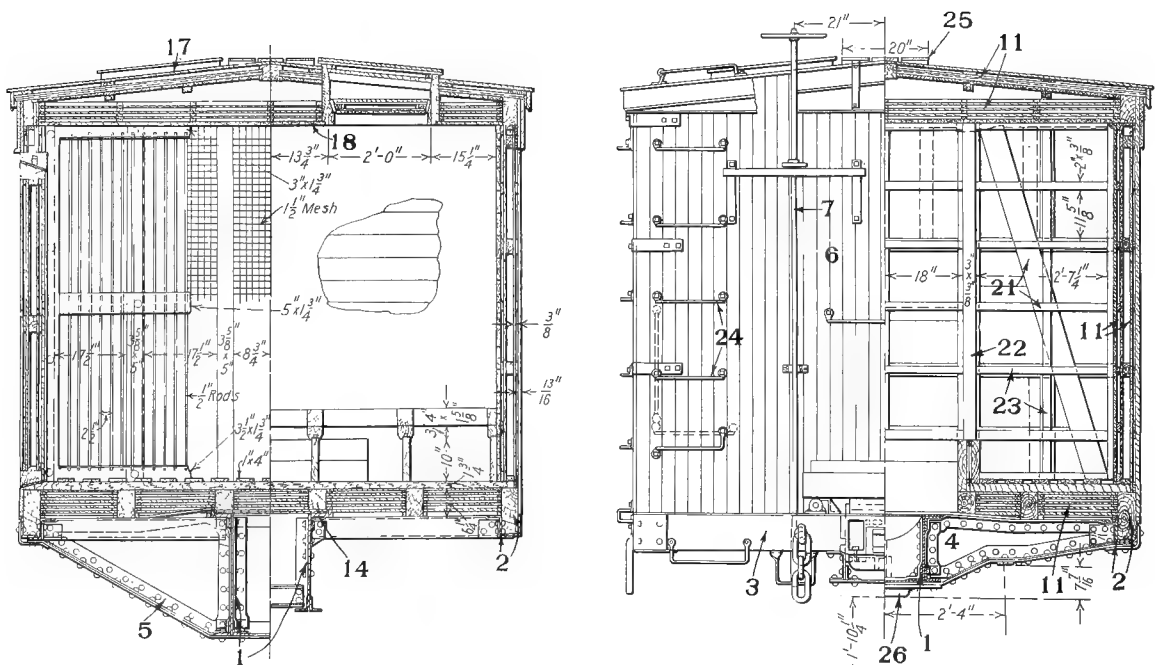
End Elevation and Cross Sections of Northern Pacific Steel Underframe Refrigerator Car for Express Service. See also Fig. 352.
